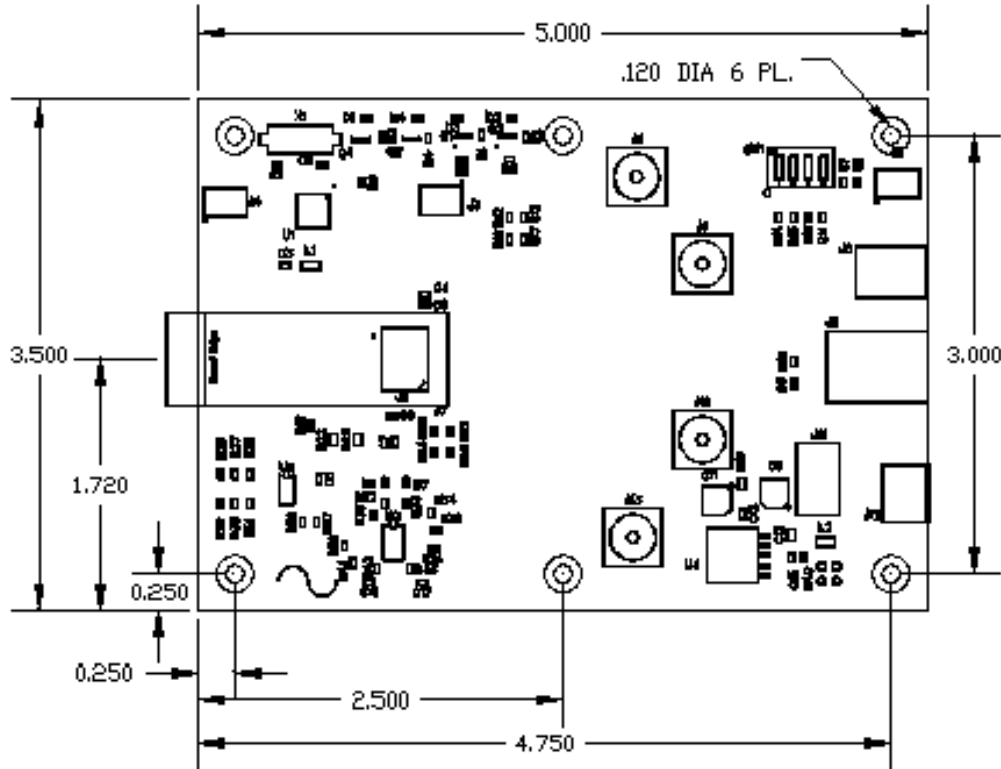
SFP+ Breakout Physical Dimensions & Connections (Dimensions are in Inches)
